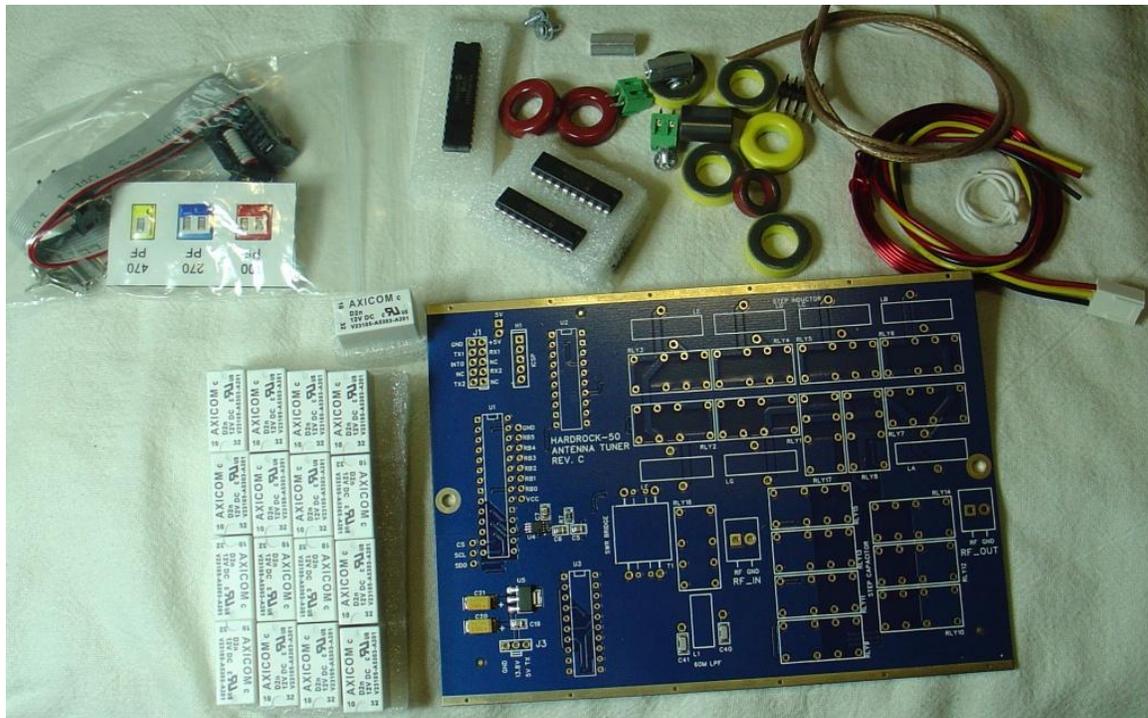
The HR50-ATU kit. The 4" x 5.5" pc board includes top- and bottom-side pre-mounted SMD components.
